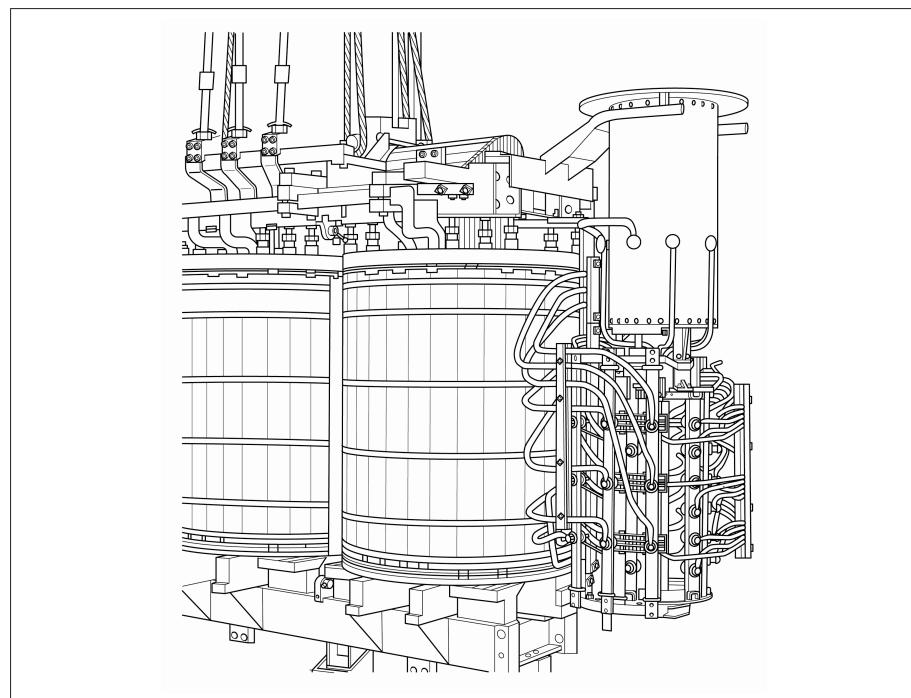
On-load tap-changer in a transformer with bell-type tank design
